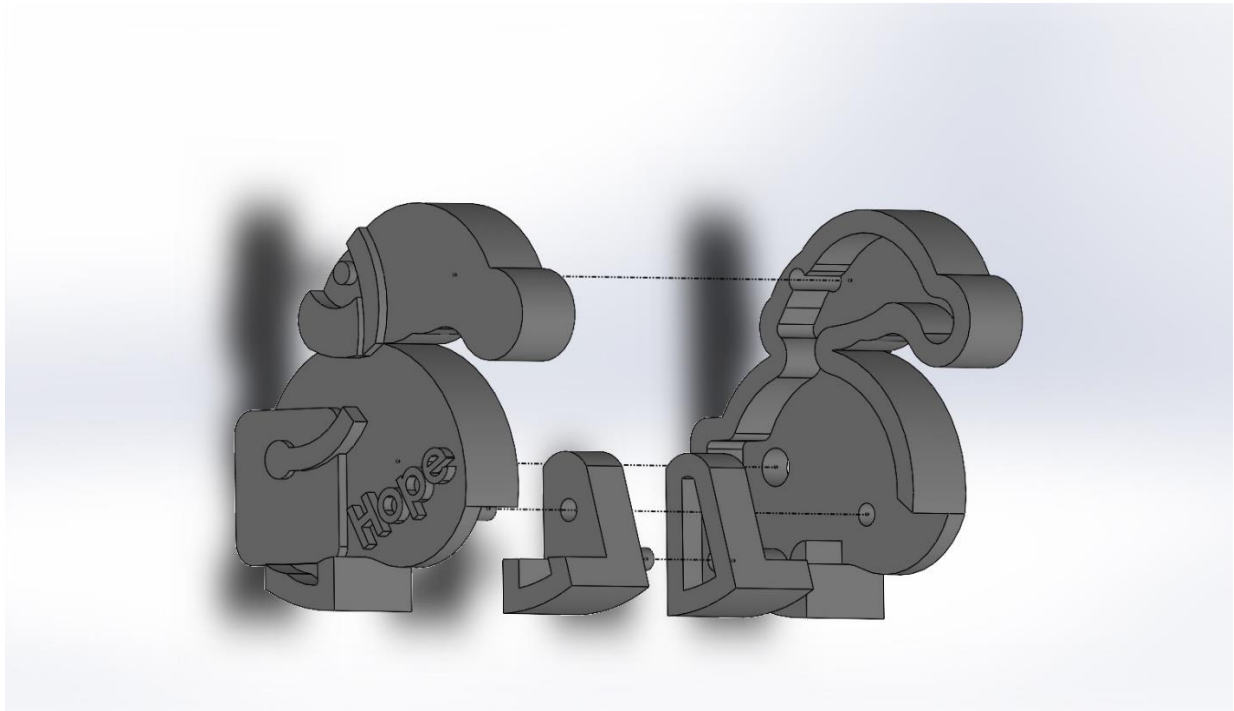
Exploded view of walking toy, Part A, B, C, and D starting from left
